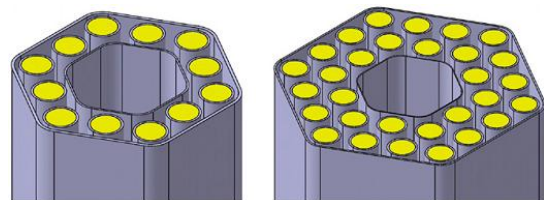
Hexagonal fuel assemblies “hex1.1” and “hex2.1”.
